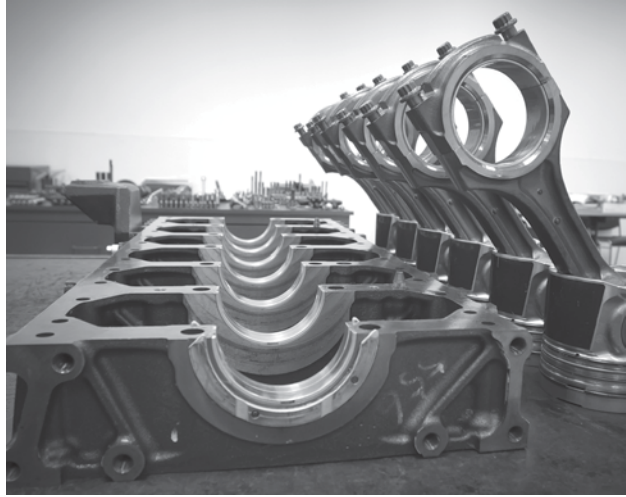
Main bearing design options for a horizontally-opposed engine
